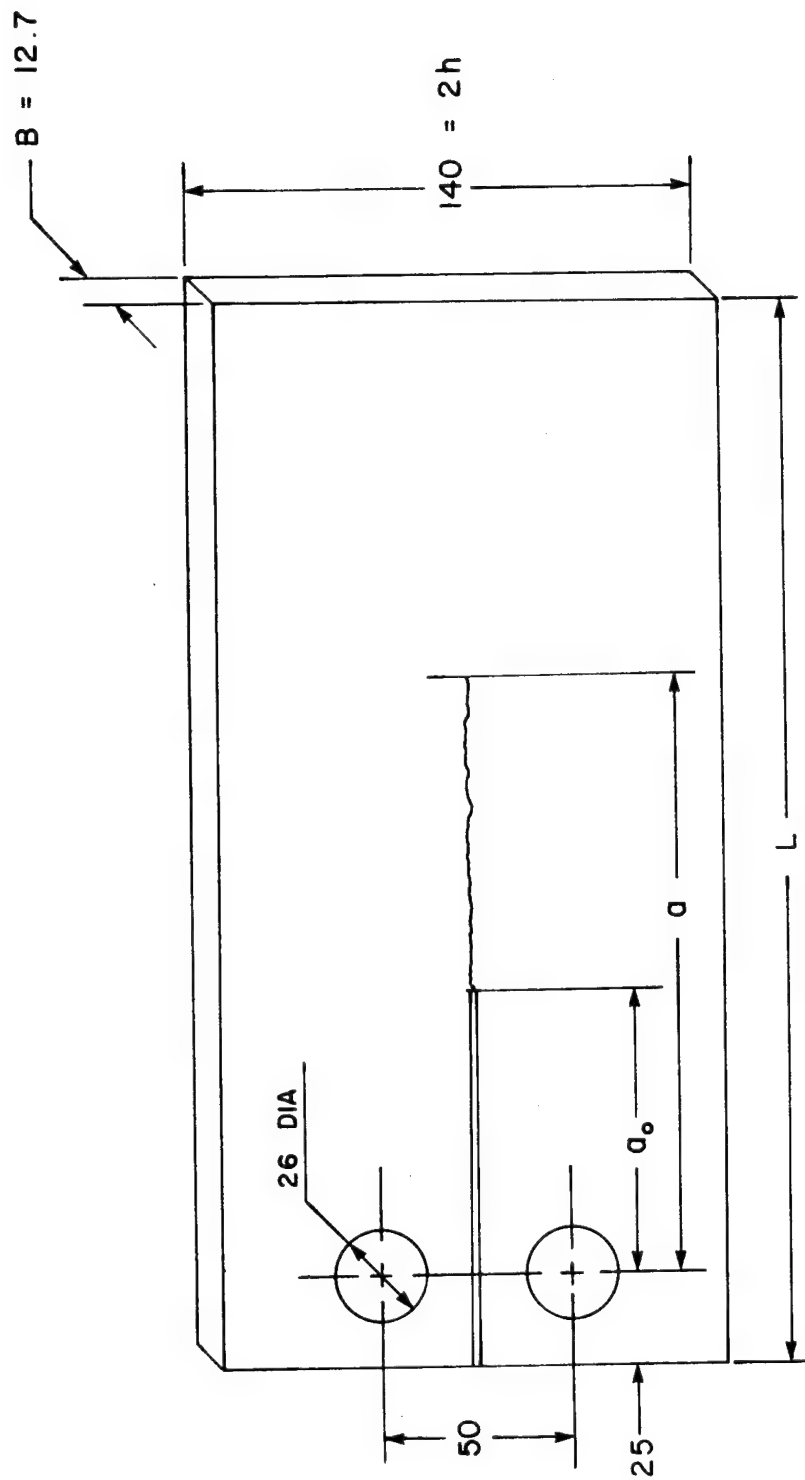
Modified Crack Arrest Compact Specimen Geometry.
